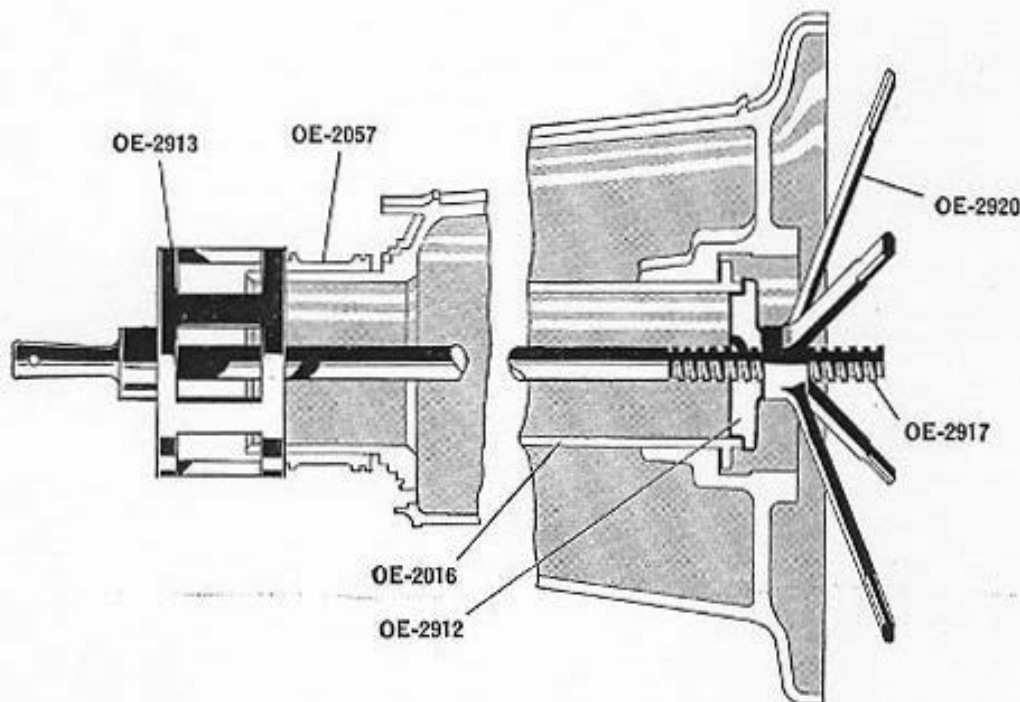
Installing bevel and spur wheel gear bushing (OE-2057) and pedestal head bushing (OE-2055) on fixed pedestal casing (299742-2)
